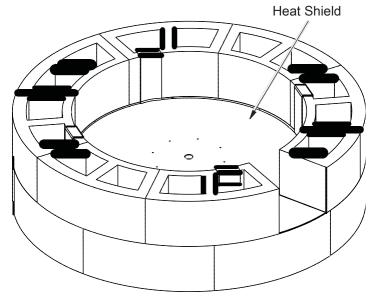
Installing Heat Sheild (MM2FR Shown)
